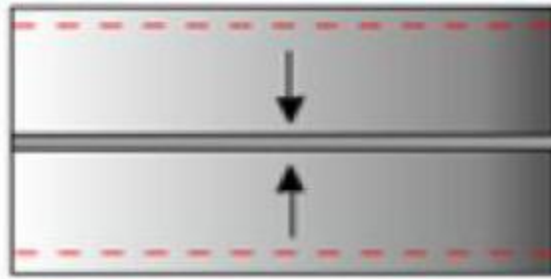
Dimensional changes occurring in a fillet weld
